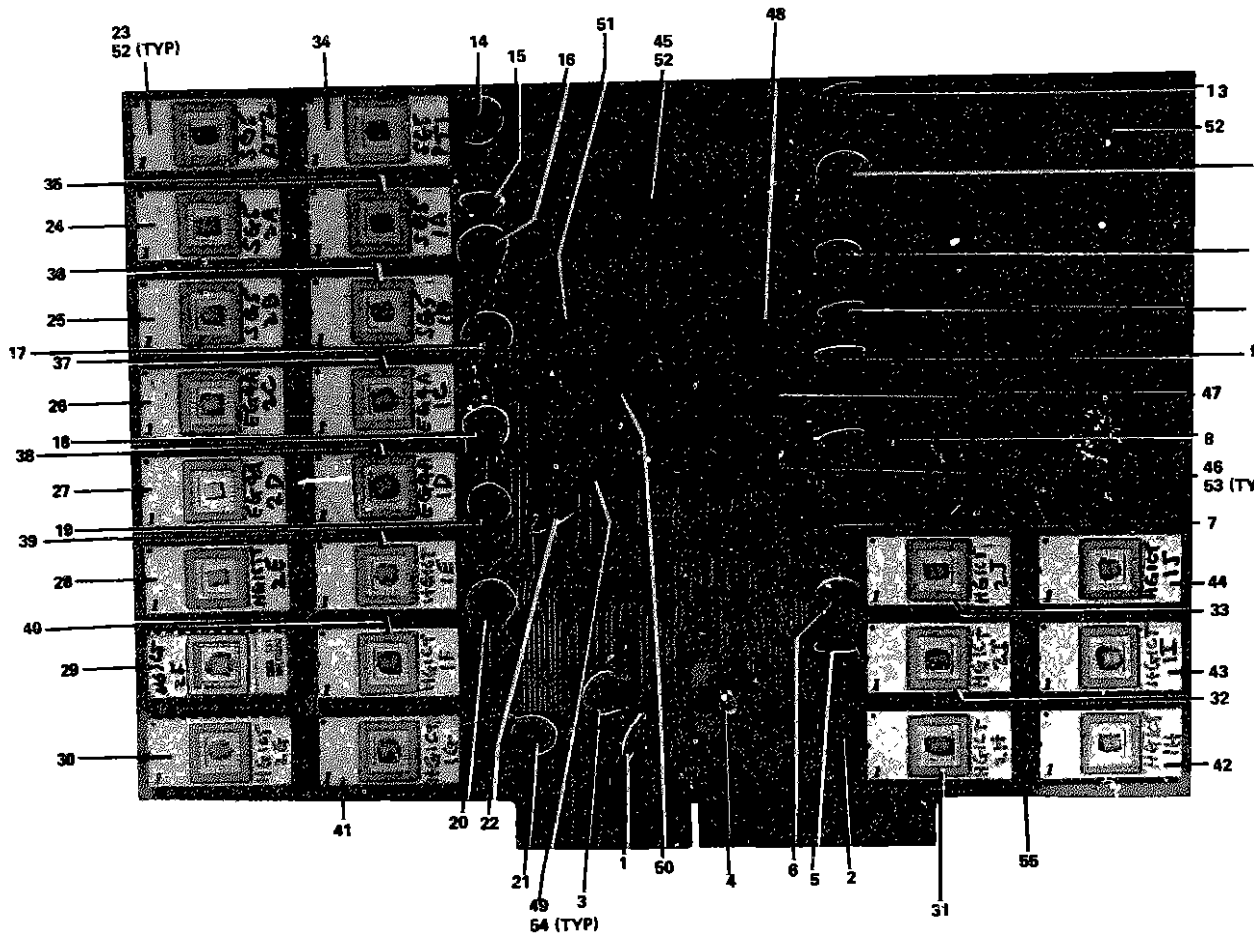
Executive 4K Macro Memory Circuit Card Assembly
